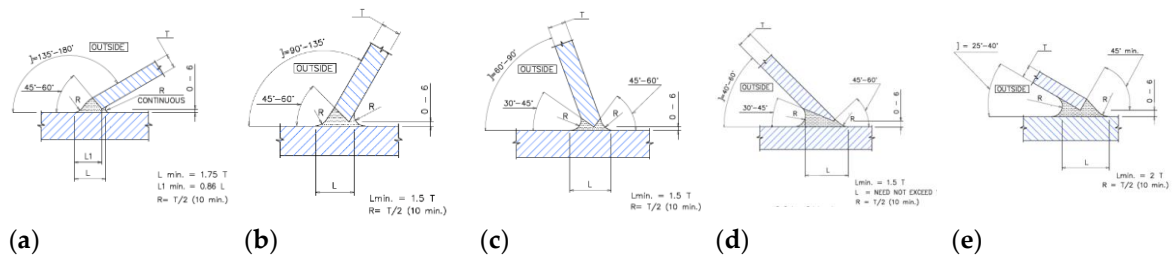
Double-sided weld detail of tubular joint (a) cross section 1; (b) cross section 2; (c) cross section 3; (d) cross section 4; (e) cross section 5
